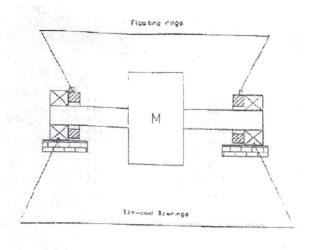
Compressor rotor mounted on tiltpad bearings and floating ring oil seals.
